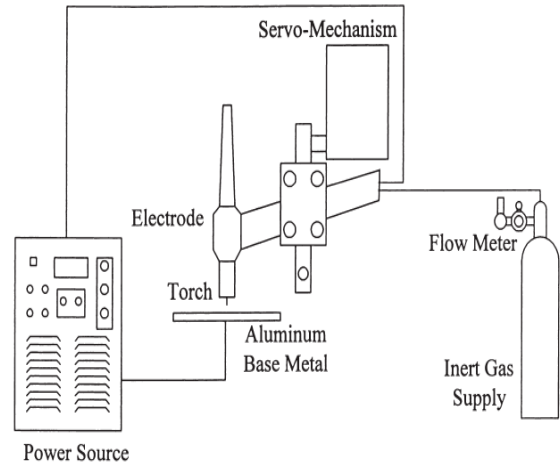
Gas Tungsten Arc Welding
